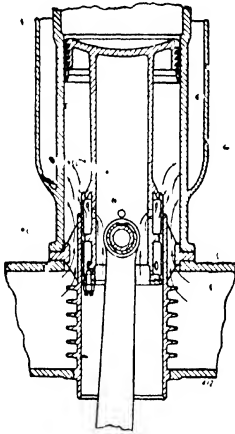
Cylinder Lubrication with Cross-head Piston
